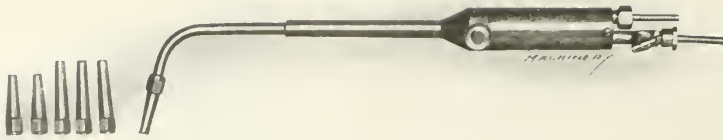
Oxy-acetylene Welding Torch made by Alexander Milburn Co.
